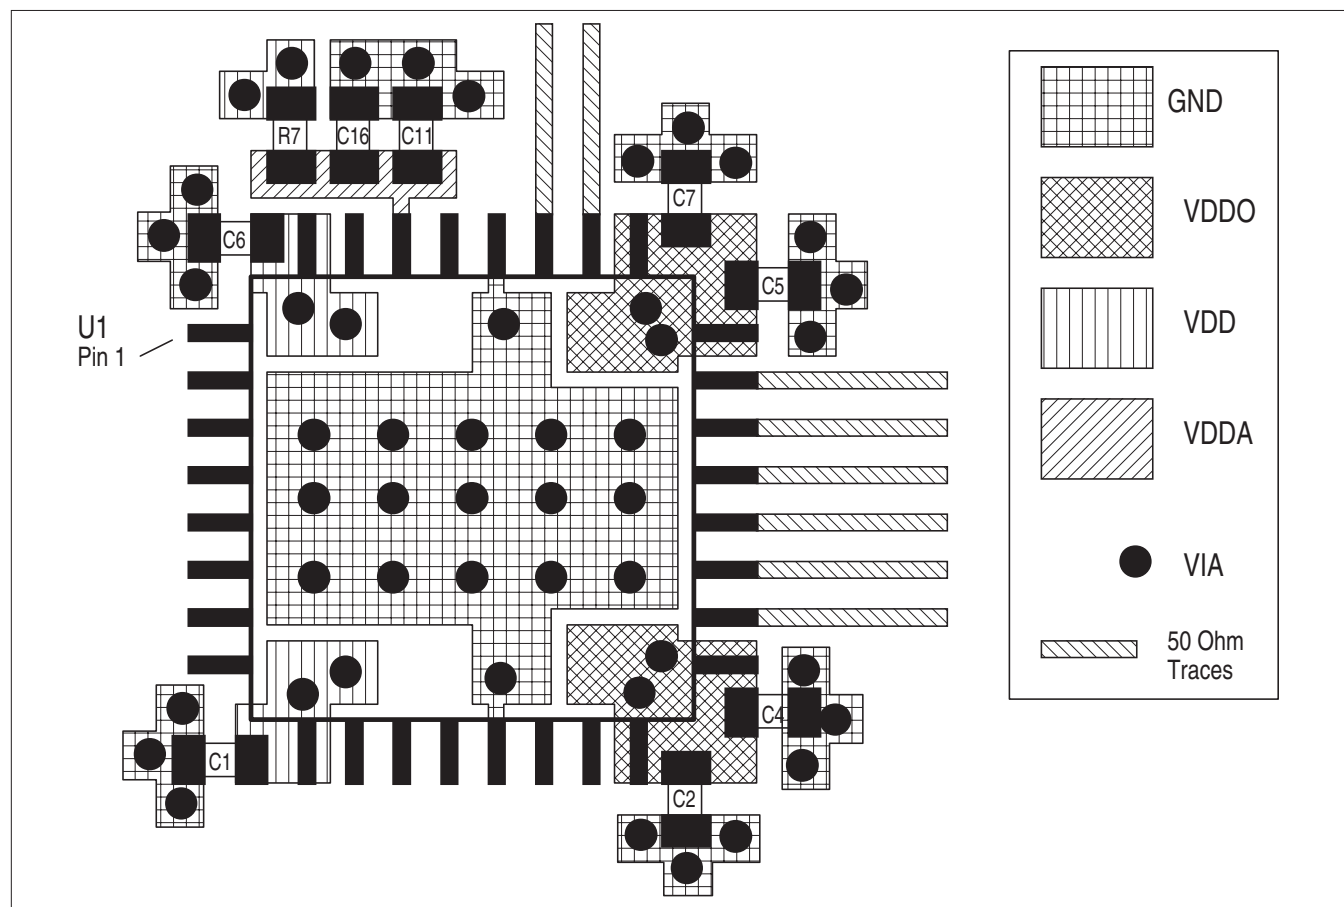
PCB BOARD LAYOUT FOR ICS8725-01
